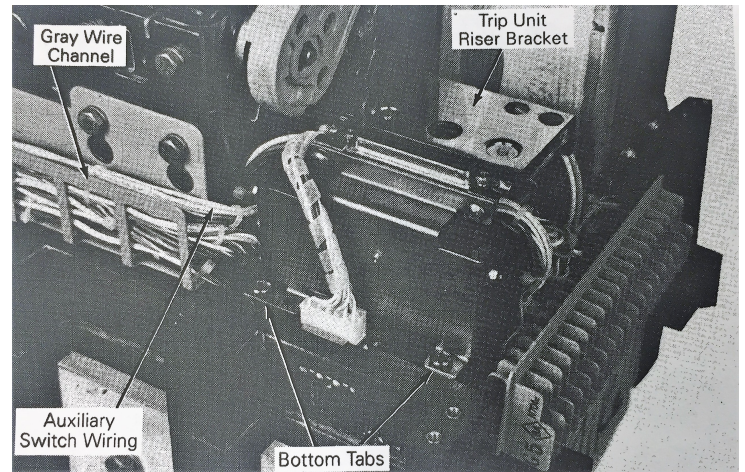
Auxiliary Switch Module installed under the trip unit plate.
